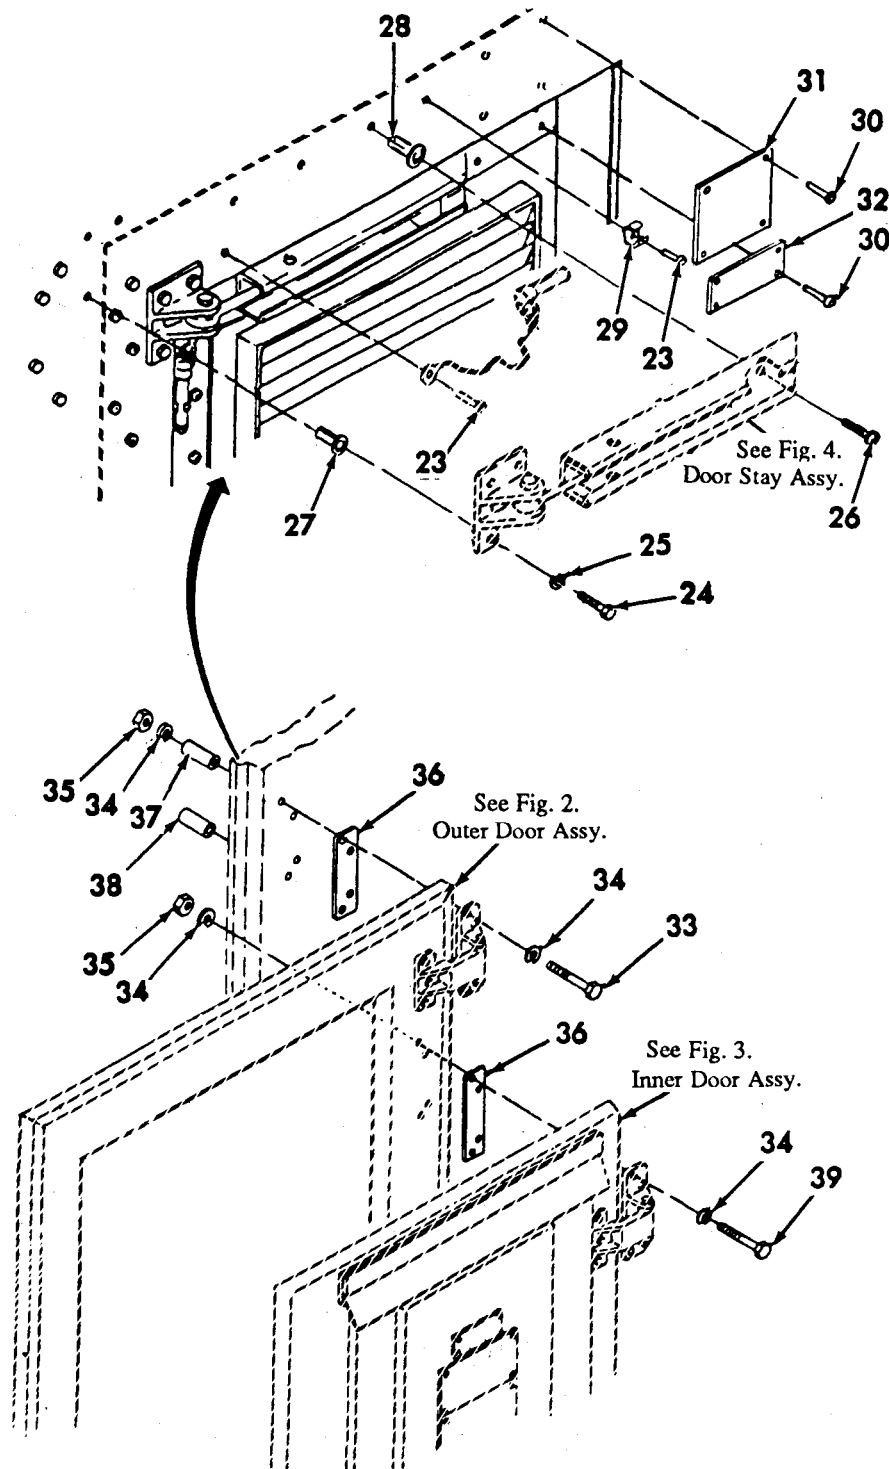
Shelter, Electrical Equipment S-250/G (Sheet 2 of 4)
